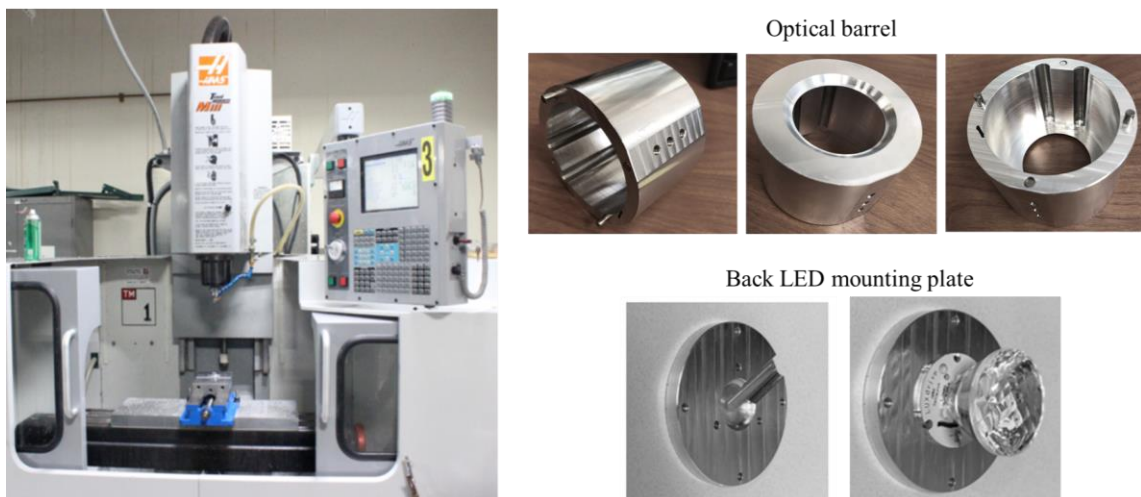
A HAAS CNC Toolroom Mill with manufactured mountings.
